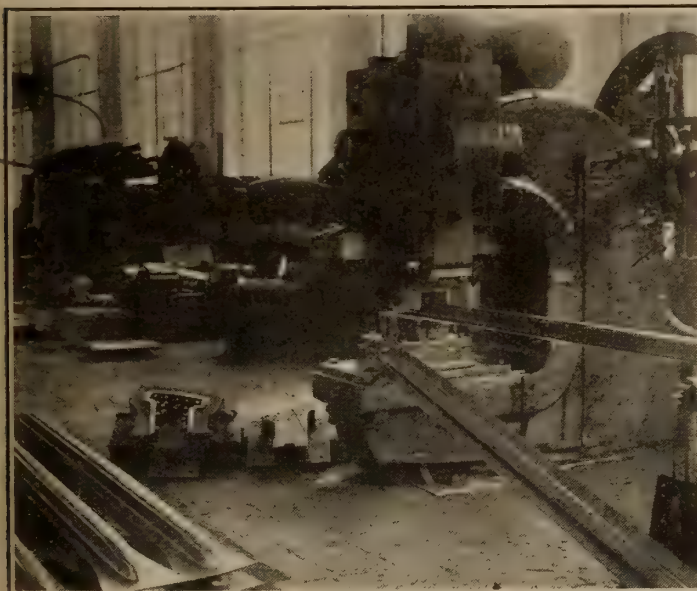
Machine for shearing and punching ends of side posts and braces.
